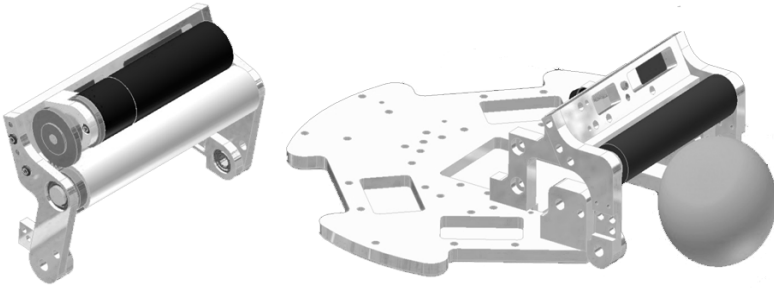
Dribbler mechanism (left) and assembled to chassis (right)
